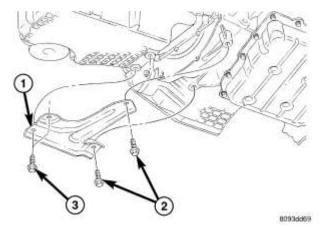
Identifying Structural Collar (Note: Cross-Under Pipe Not Shown)
